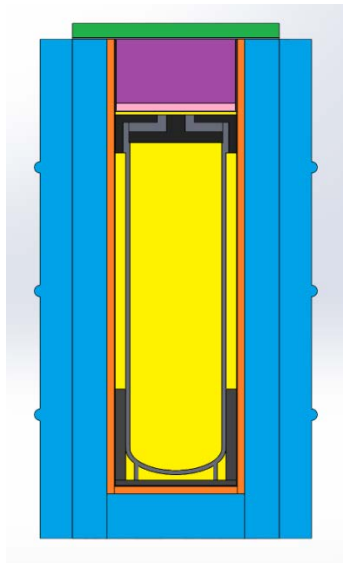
9977 Package geometry – cross-sectional view through the center of the package
